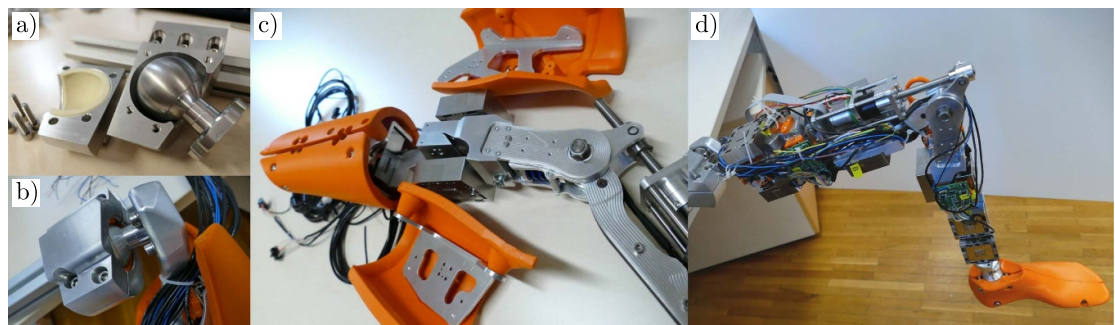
Construction details: (a) disassembled hip joint, (b) assembled hip joint, (c) disassembled surface shells, and (d) underlying leg structure with all the electronics.
